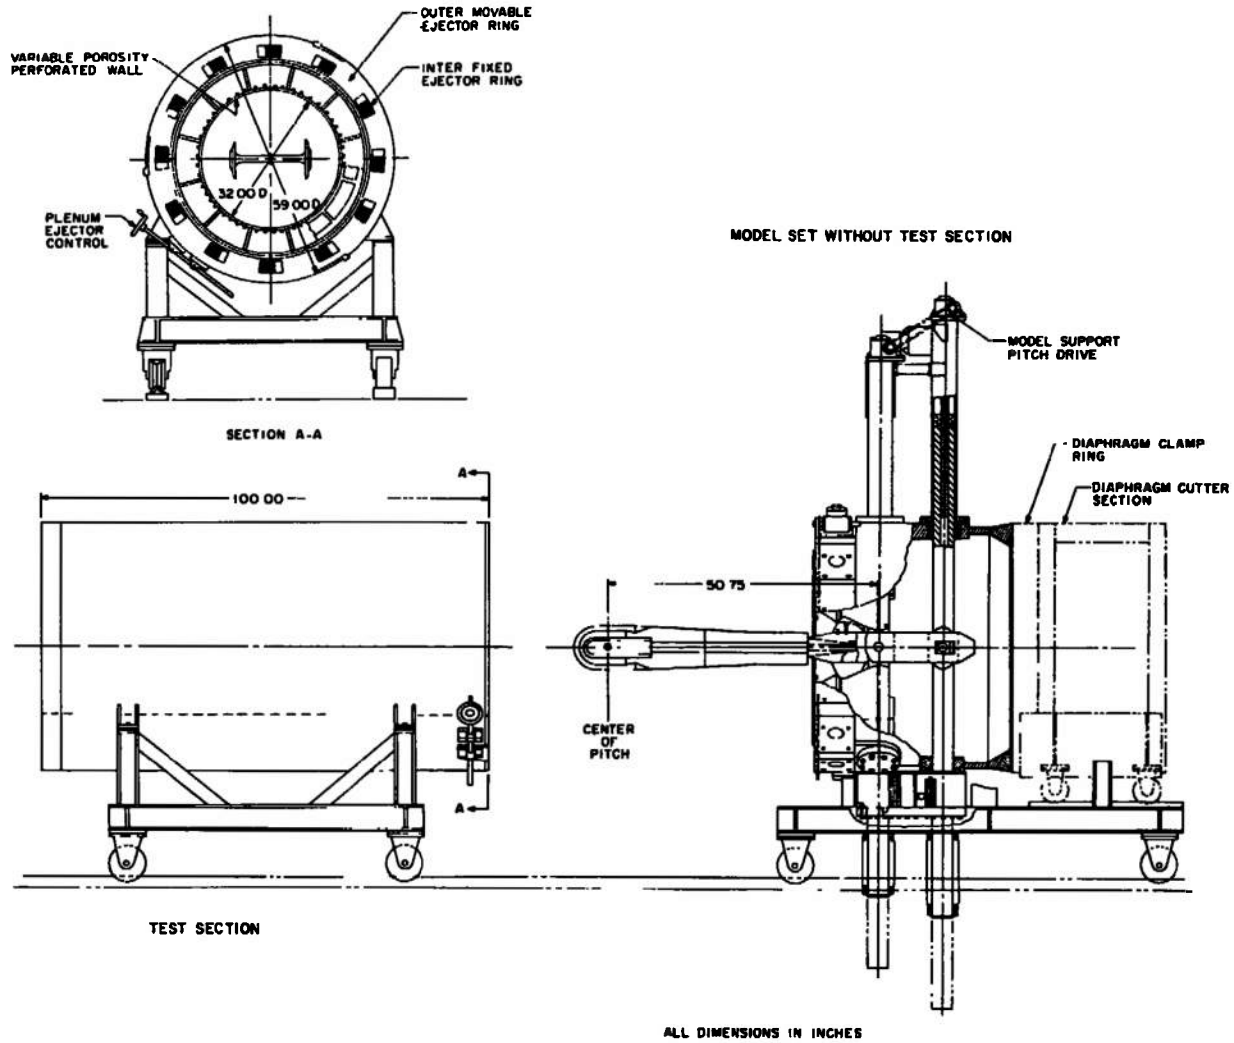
Test Section of Marshall Space Flight Center High Reynolds Number Tunnel Showing 6-in.-Chord Airfoil Model Location
